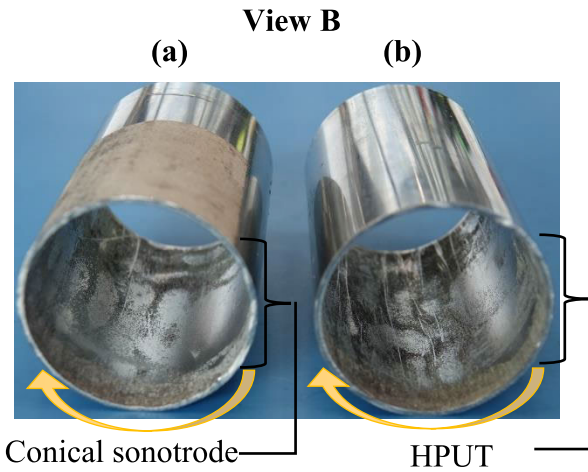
View B section for (a) conical sonotrode and (b) HPUT.
